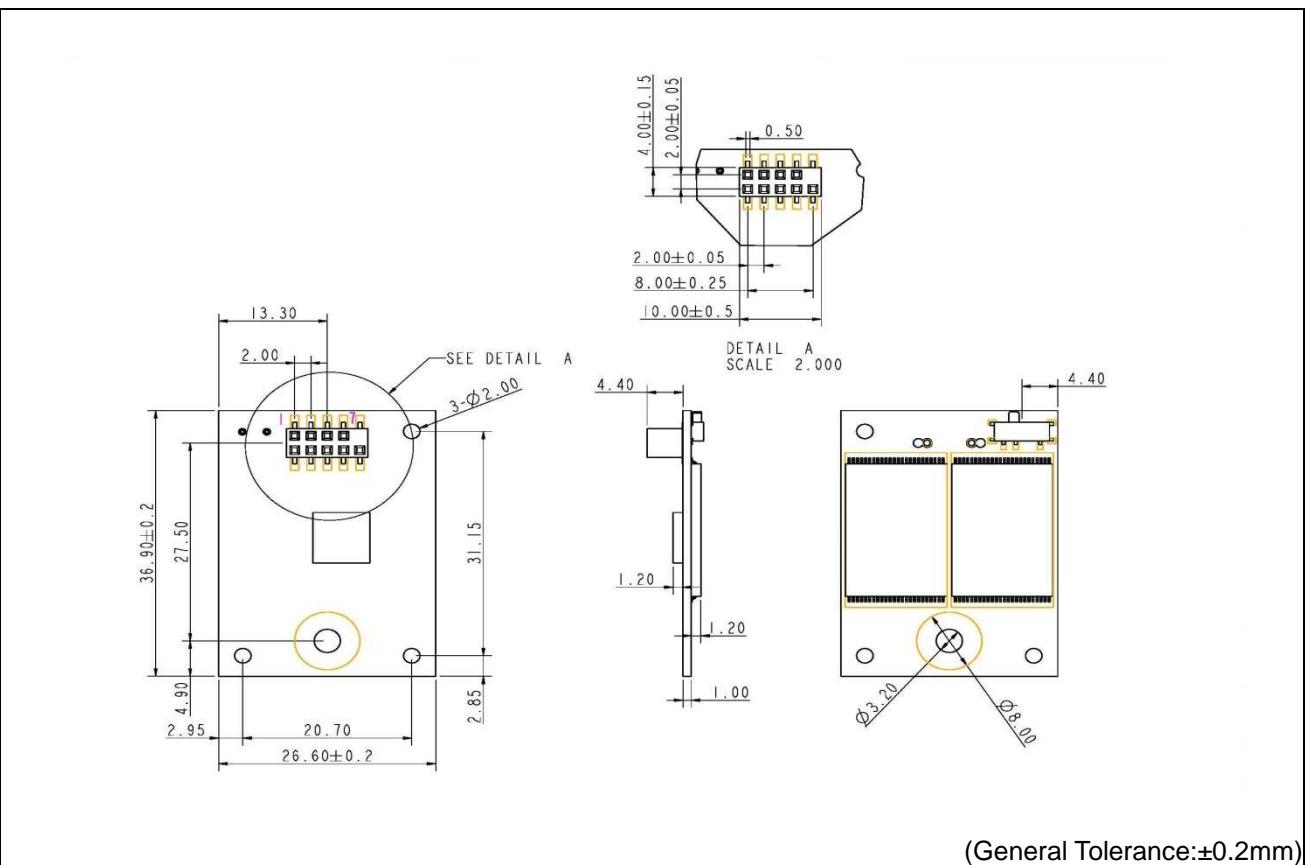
USB EDC Horizontal 2ME mechanical dimensions
